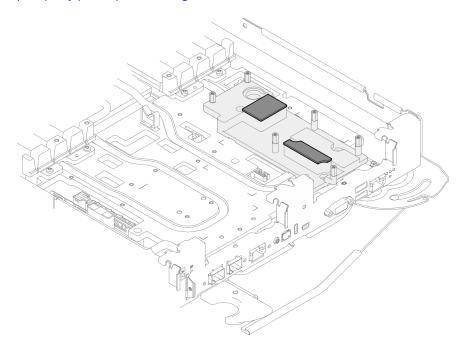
ConnectX-8 riser assembly interface plate single-use gap pad
